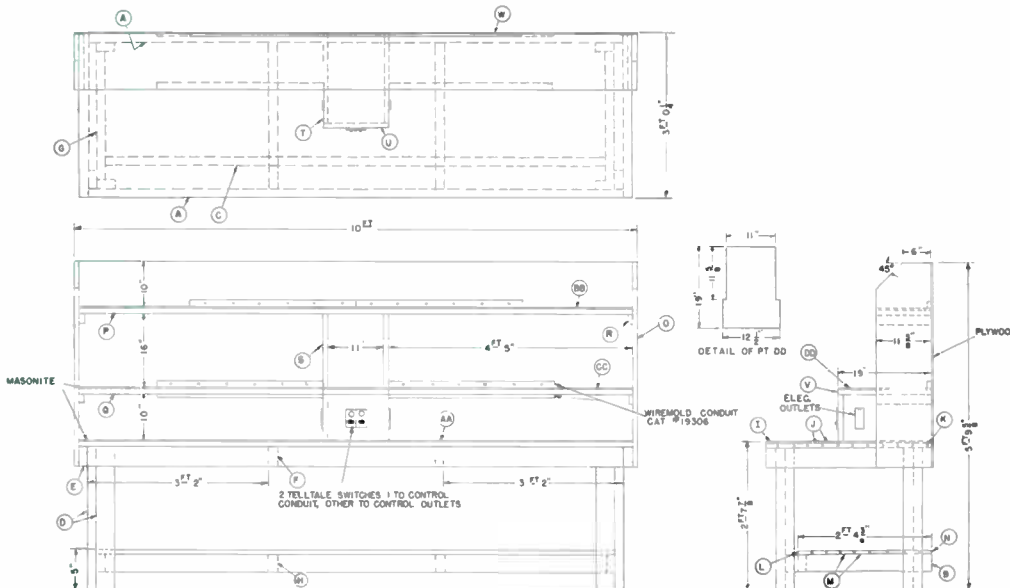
Detail drawing of Service Bench without side cabinets showing location of parts listed under bill of materials.
